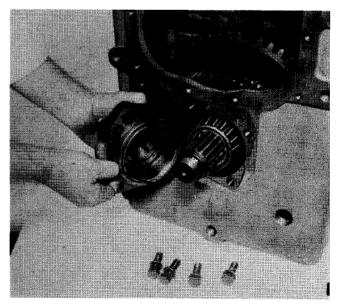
Remove output shaft rear bearing cap bolts and bearing cap.
